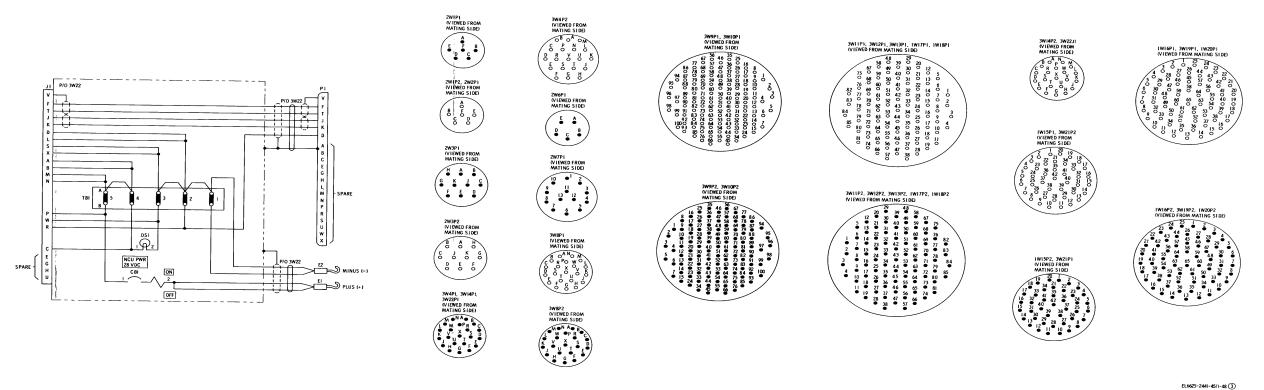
3. Special purpose electrical cable assembly, schematic diagram (part 3 of 3).
